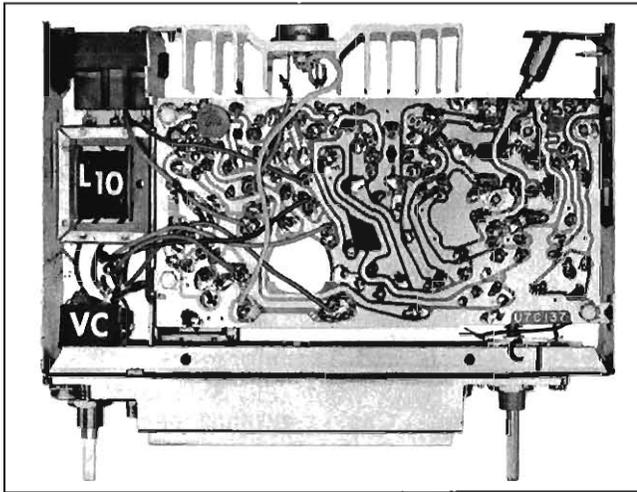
CORVAIR - PARTS LAYOUT - CIRCUIT BOARD VIEW - 985831 - RADIO
